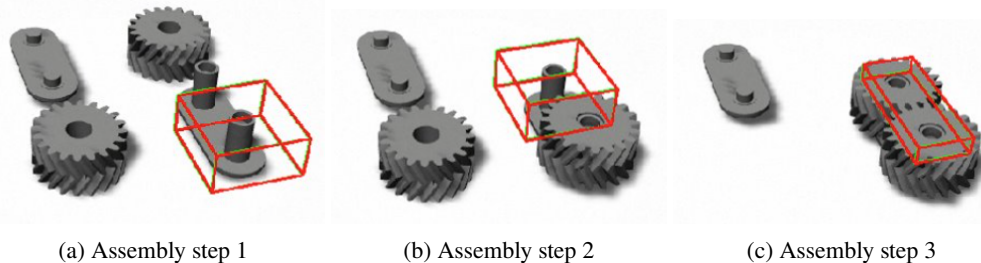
Estimated (green bounding box) and ground truth (red bounding box) 6D assembly poses for assembly steps 1-3 in helical gear assembly: left gear to bottom casing (a), right gear to bottom casing (b), top casing to complete assembly (c).
